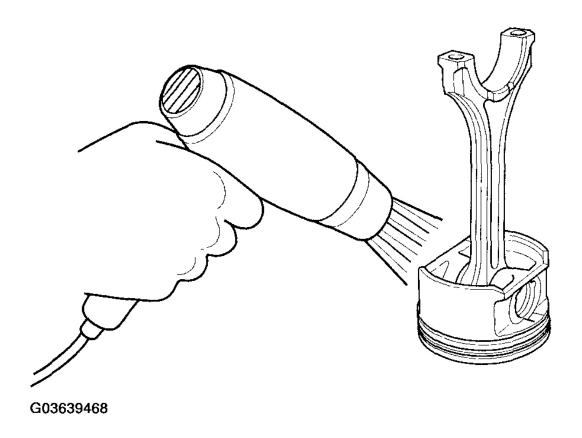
Heating Piston And Connecting Rod Assembly Courtesy of AMERICAN HONDA MOTOR CO., INC.
